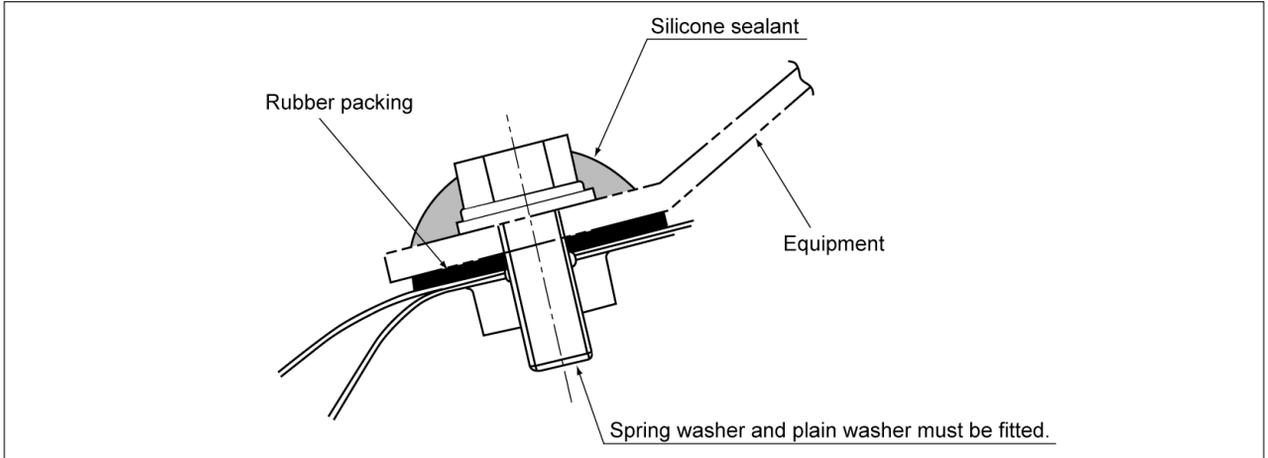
Location of the M8 bolts on the cab roof (single cab)
